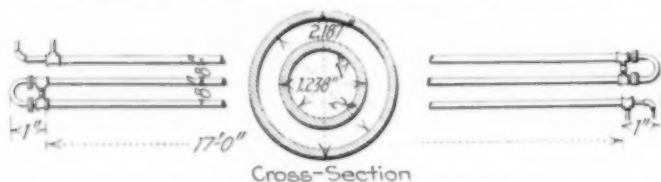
VIEW AND CROSS-SECTION OF FLAT COIL COOLER
